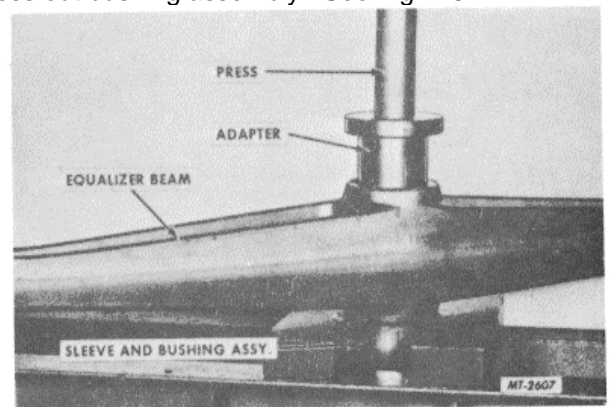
Removing Equalizer Beam Center Sleeve and Bushing
